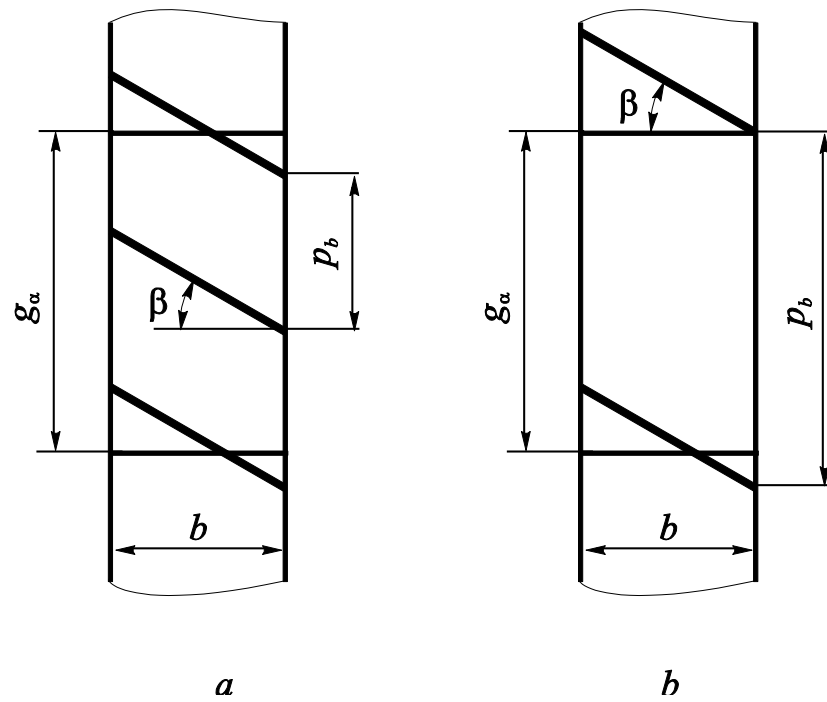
Locus of contact lines of teeth during a helical gears engagement:
